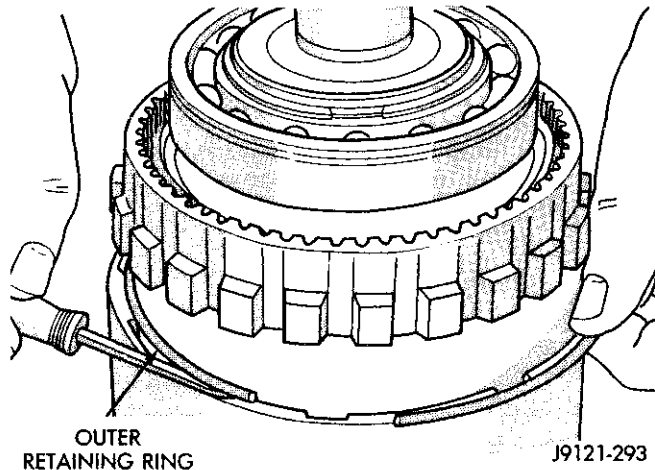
Clutch Drum And Outer Retaining Ring Installation
